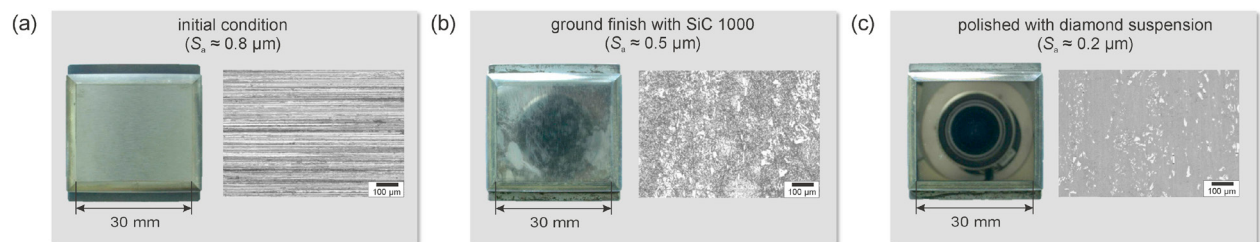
(a) Oxidized specimen for plane strip drawing tests in initial condition after manufacturing; (b) oxidized specimen for plane strip drawing tests ground with SiC 1000 abrasive; (c) oxidized specimen for plane strip drawing tests polished with diamond suspension.
